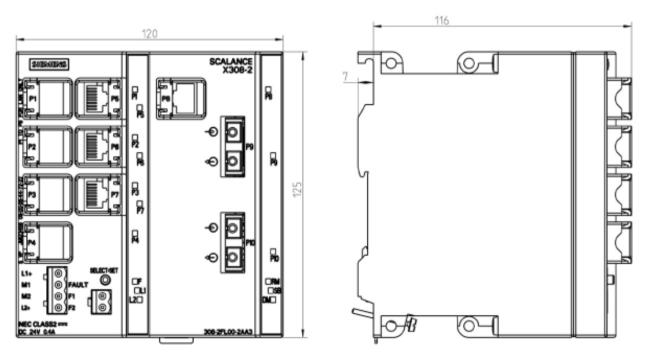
Medium design dimension drawing (example used here SCALANCE X308-2)
